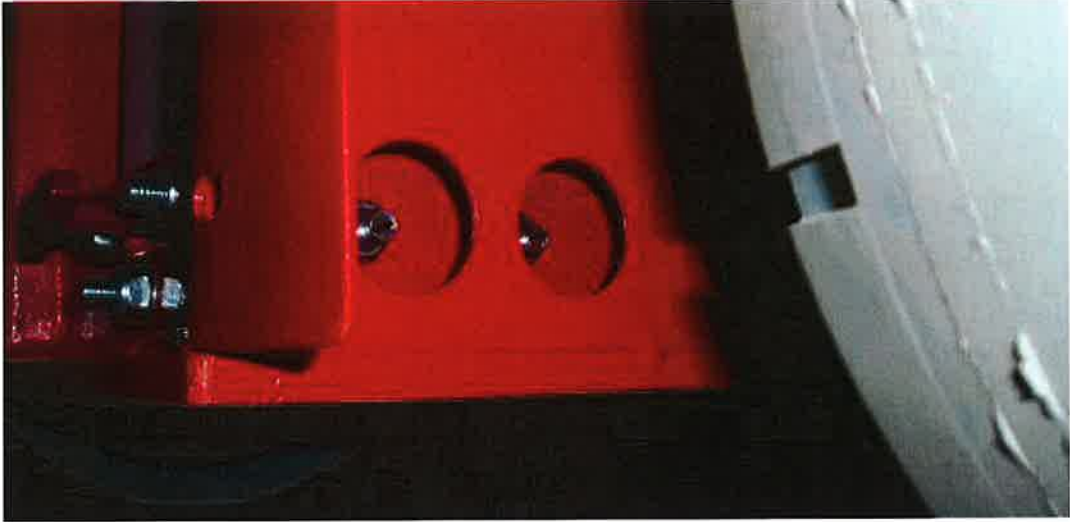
Access to the side bolts can be gained through the holes in the side of the chassis.
